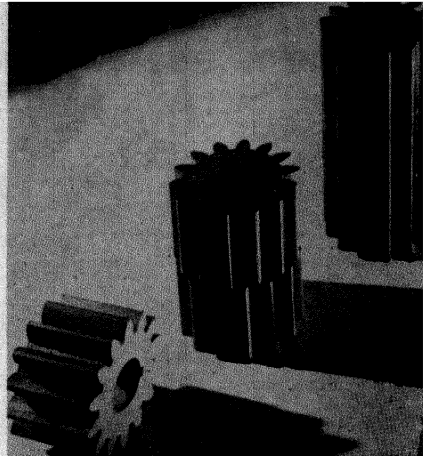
Spur gears and gear combinations from cemented steel. The exceptionally long gear at the right was made by infiltration-brazing three individually pressed gears together, with the teeth in alignment. All gears were radially infiltrated as indicated in Figure 499.
